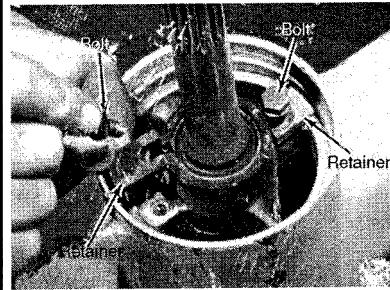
or remove the two bolts, washers and retainers from the end of the bearing carrier (all other models except early-model V8s with internal retainers)
